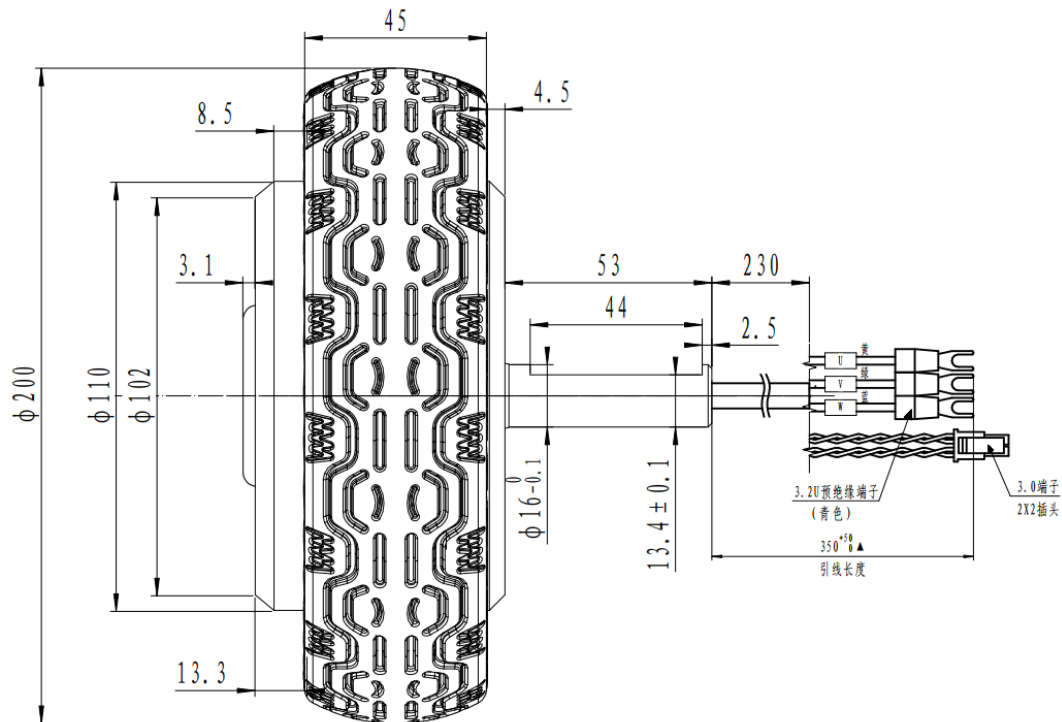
8 inch 7Nm hub motor mounting size
